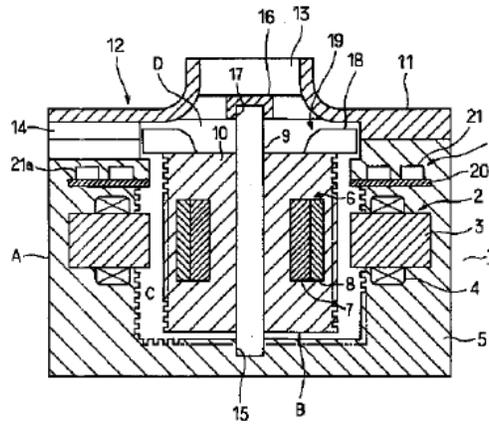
of Umeda depicts motor 1 including molded stator A and molded rotor B. See Ex. 1004 ¶¶ 14–15. Molded stator A is formed from resin 5, and includes stator coils 4 fitted to stator core 3. See *id.* ¶¶ 14–15, 20. Molded rotor B is formed of resin 10, and includes cylindrical rotor core 7 and permanent magnet 8. See *id.* ¶ 15. “Resin that has high thermal conductivity, such as acrylic resin, is used as the resin 5 and 10 of the molded stator A and molded rotor B.” *Id.* Casing cover 11 and molded stator A together form pump casing 12, with intake port 13 and discharge port 14. See *id.* ¶ 16. In operation, “liquid is taken into the internal space D of the pump casing 12 from the intake port 13 . . . and is then discharged as high-pressure fluid from the discharge port 14.” *Id.* ¶ 21. “[L]iquid taken
